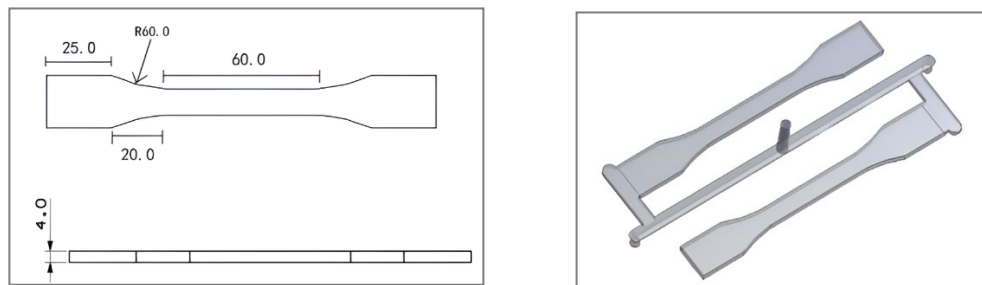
(a) Drawing of Plastic Mould, (b) 3D Plastic Mould
